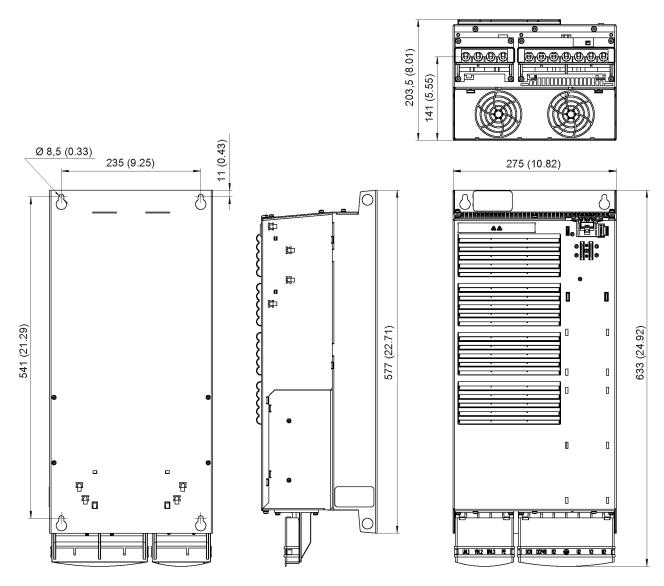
Dimension drawing, PM340 Power Module, frame size FSE (with integrated line filter); all dimensions in mm and (inches)
